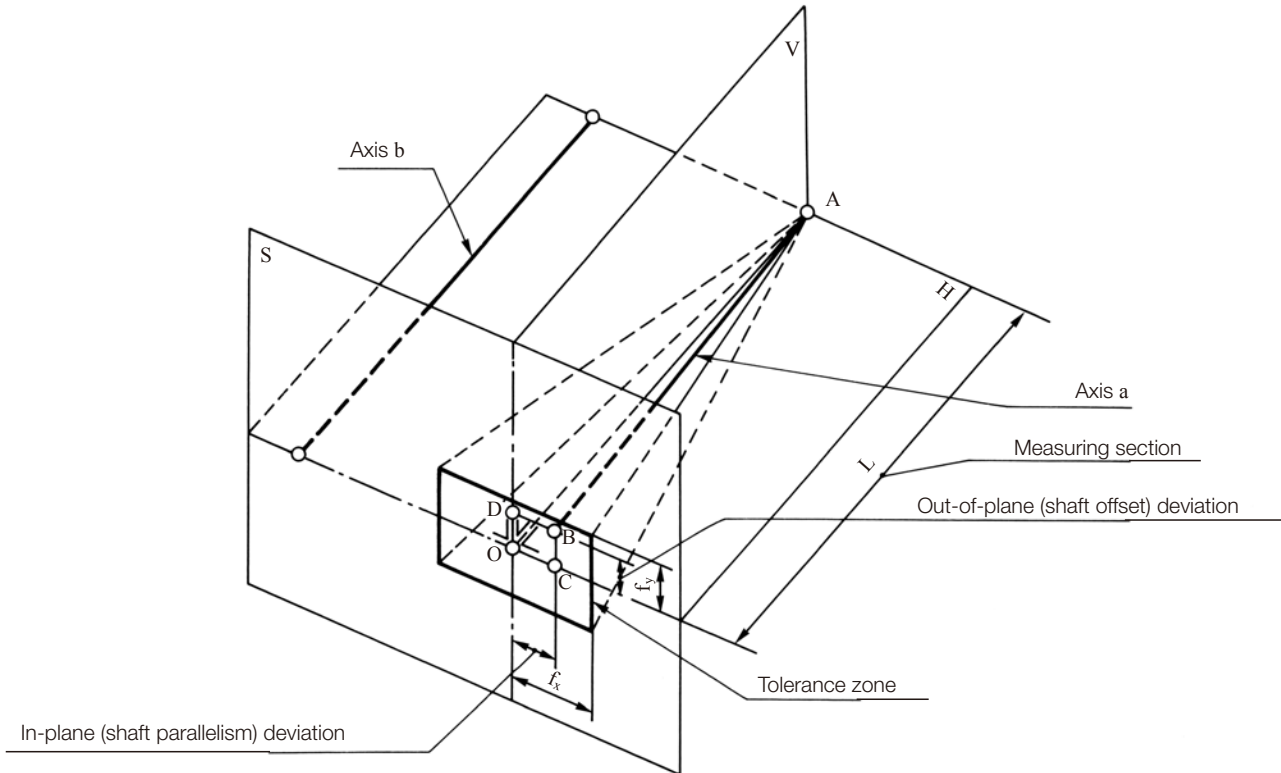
Shaft Parallelism Error and Shaft Offset Error
